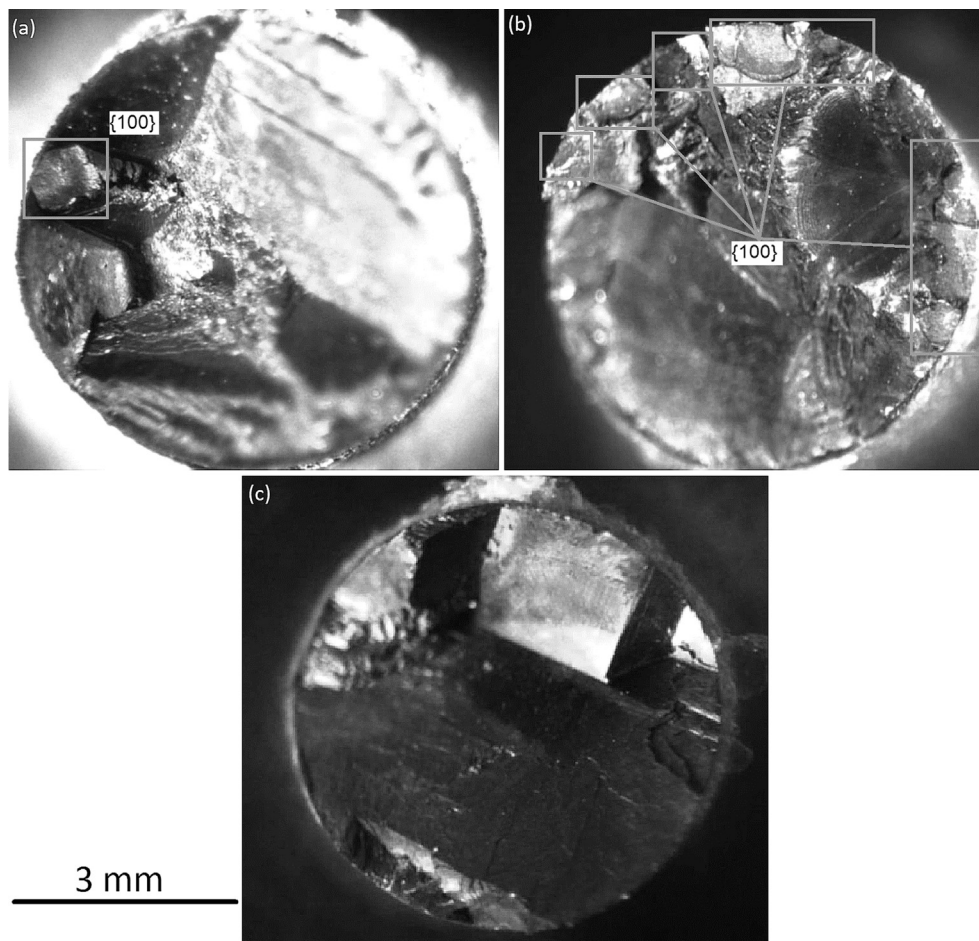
Optical images of plain specimen fracture faces, (a) 800 MPa, 1-1-1-1 (s) trapezoidal loaded fatigue specimen, 500 h pre corrosion with $5 \mu\text{g}/\text{cm}^2/\text{h}$ flux at 550°C , showing one $\{100\}$ thumb nail fracture site, (b) 800 MPa, 1-60-1-1 (s) trapezoidal loaded fatigue specimen, 500 h pre corrosion with $5 \mu\text{g}/\text{cm}^2/\text{h}$ flux at 550°C , showing multiple $\{100\}$ thumb nail fracture sites, (c) 775 MPa, 1-1-1-1 (s) trapezoidal fatigue specimen, 500 h pre corrosion with $1.25 \mu\text{g}/\text{cm}^2/\text{h}$ at 550°C , showing no optically visible $\{100\}$ thumb nail fracture sites at this magnification.
